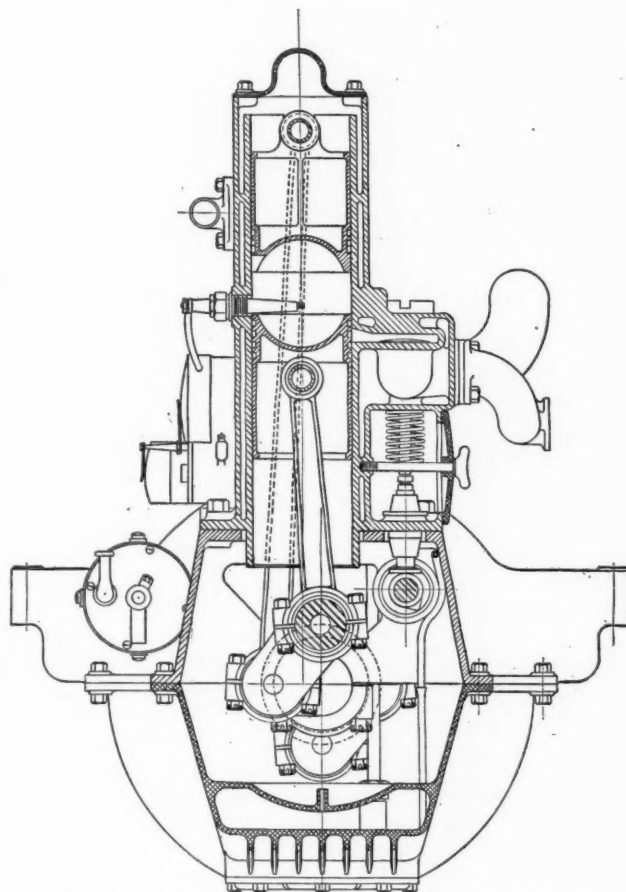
Section through double piston engine of Petroleum Motors Co.
